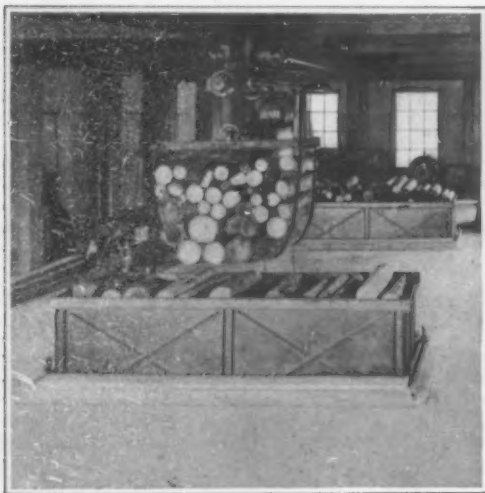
Charging a magazine grinder with wood. The grinder holds enough for a twelve-hour shift.
